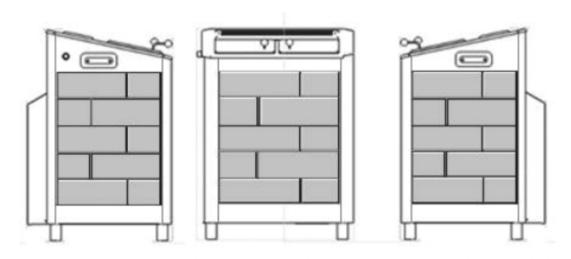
Layouts of the installation of decorative stone facing tiles for EH 10-16 kW
